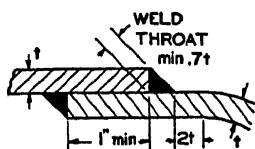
Plug and Full-fillet Lap Welded Joints.
